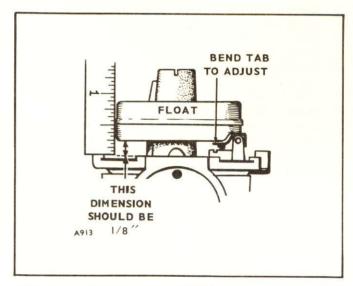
ZENITH CARBURETOR FLOAT ADJUSTMENT
